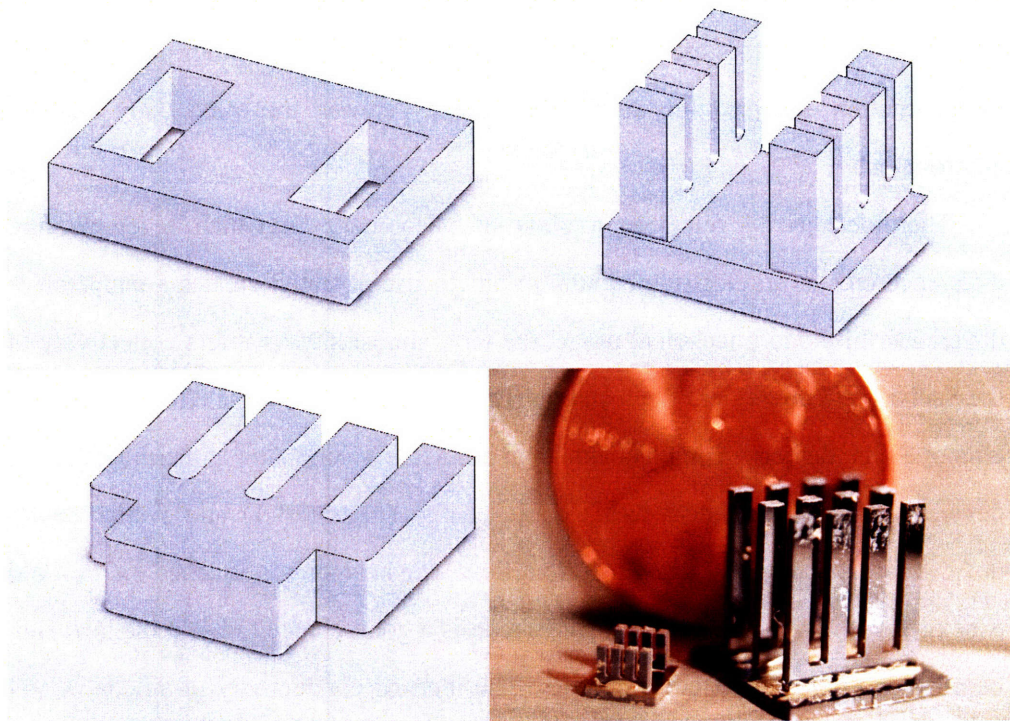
The heat sink. Top-left: base part; bottom-left: erected part; top-right: schematic view of the heat sink; bottom-right: fabricated and assembled heat sinks.
